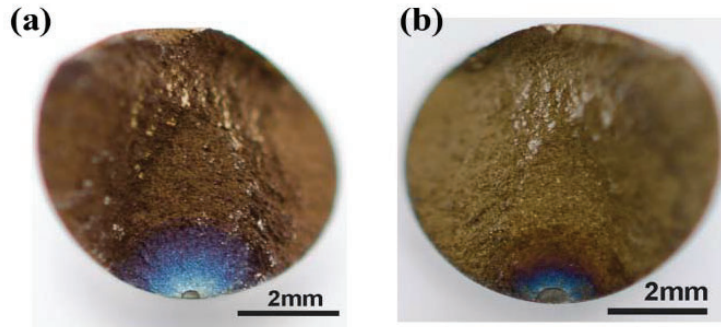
The macro-fractography of EDM notch specimens: a) small surface defect; b) large surface defect.
